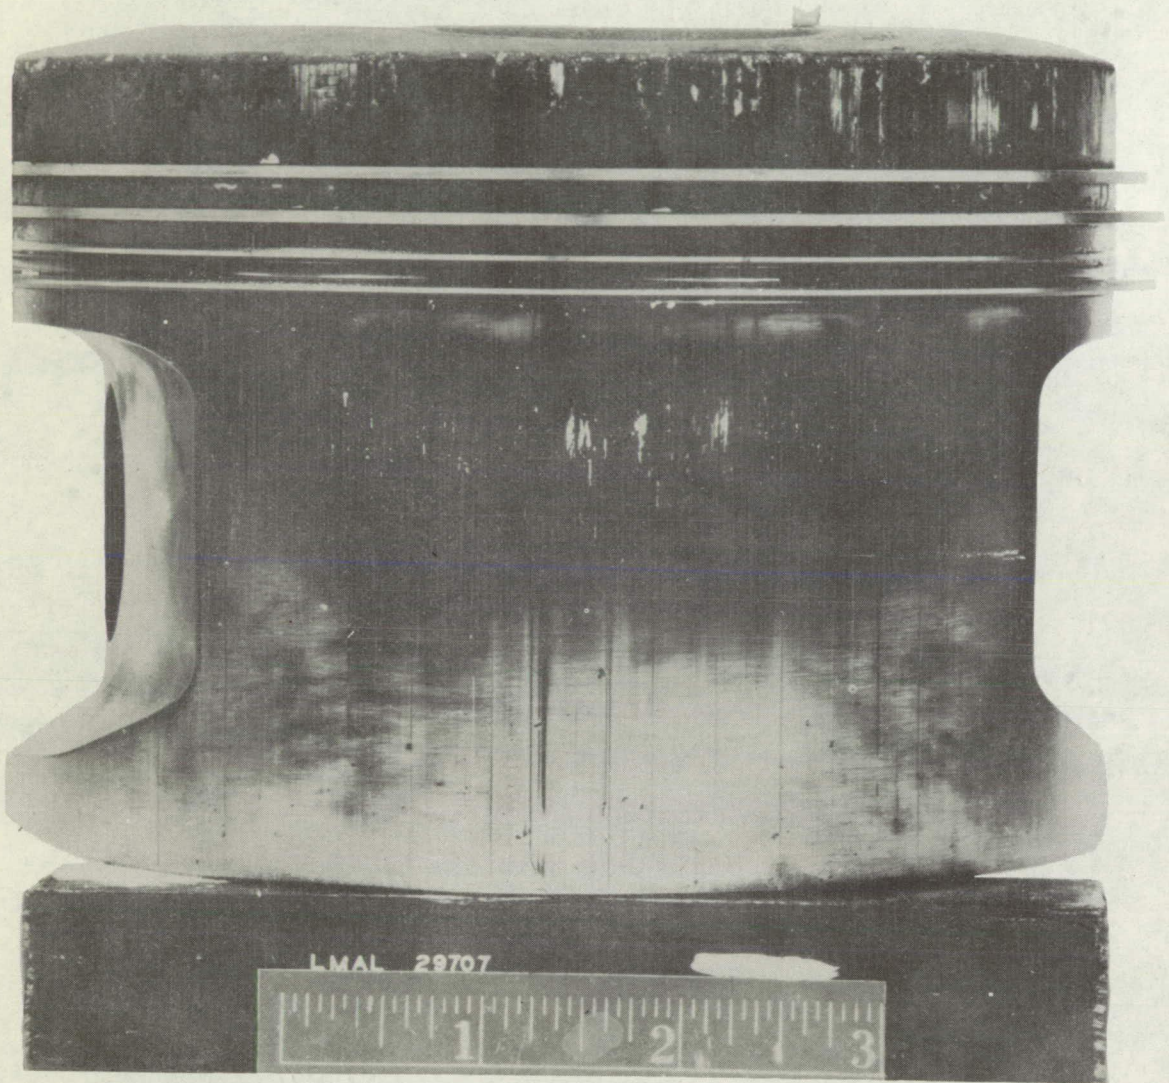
Piston assembly after high-output tests. High-tension oil rings.
